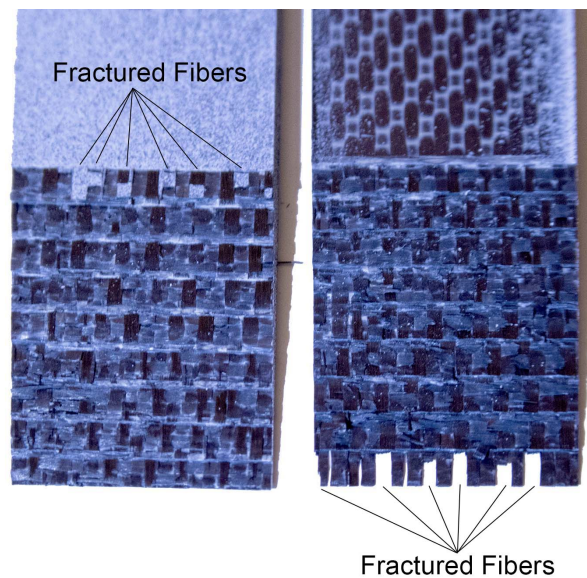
Fracture surface of the STP-T1 sample. Fractured fibers are indicated in the picture.
